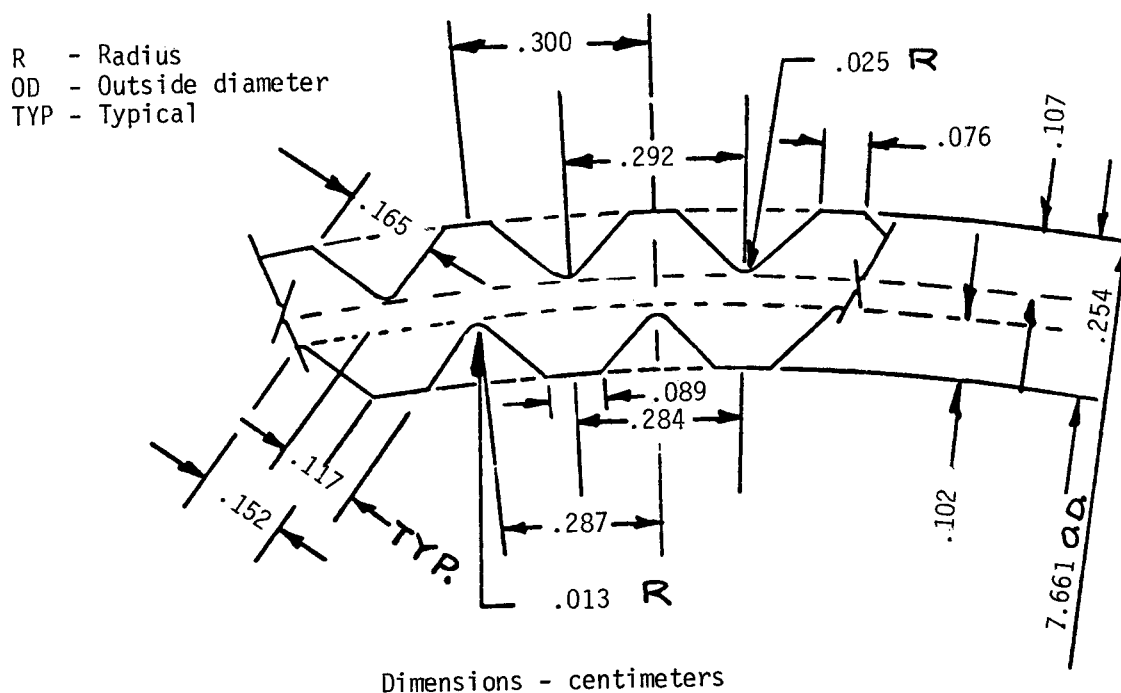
Cross Section of a Doubly Fluted Heat Exchanger Tube
